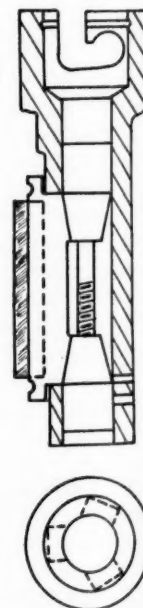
1 1/2 in. Hutto grinder having screw driver adjustment of cones
